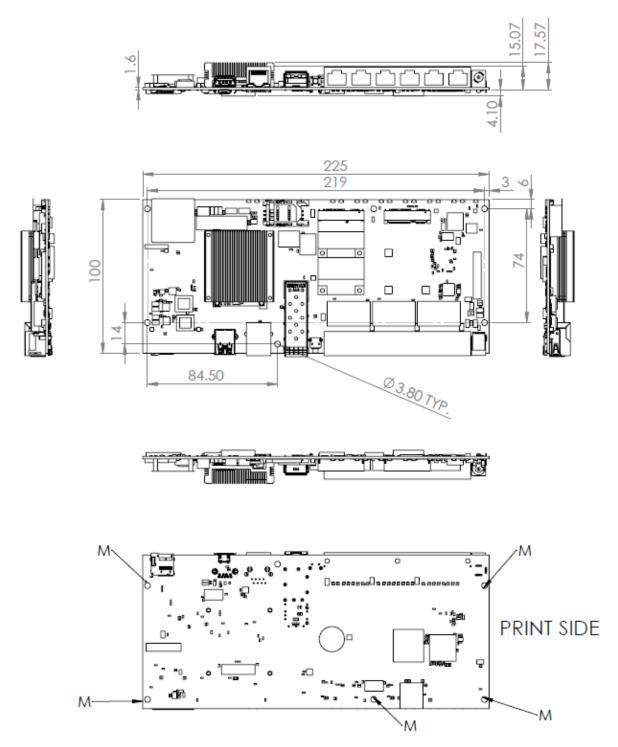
ClearFog Pro Mechanical Drawings & Dimensions
